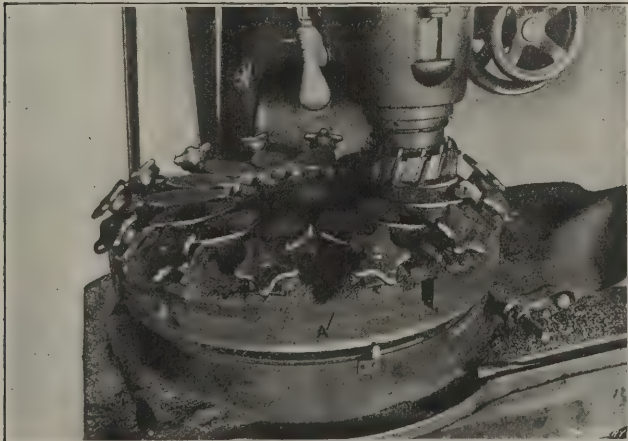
Continuous Rotary Milling Fixture used on the Becker Vertical Milling Machines for holding the Sad Iron Bases while machining
